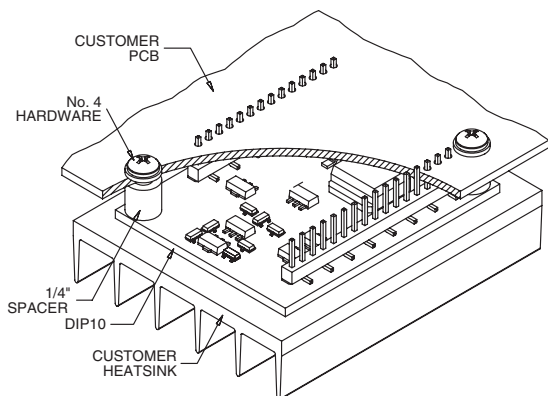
Mounting CL (DIP10) packages to very small heatsinks.
